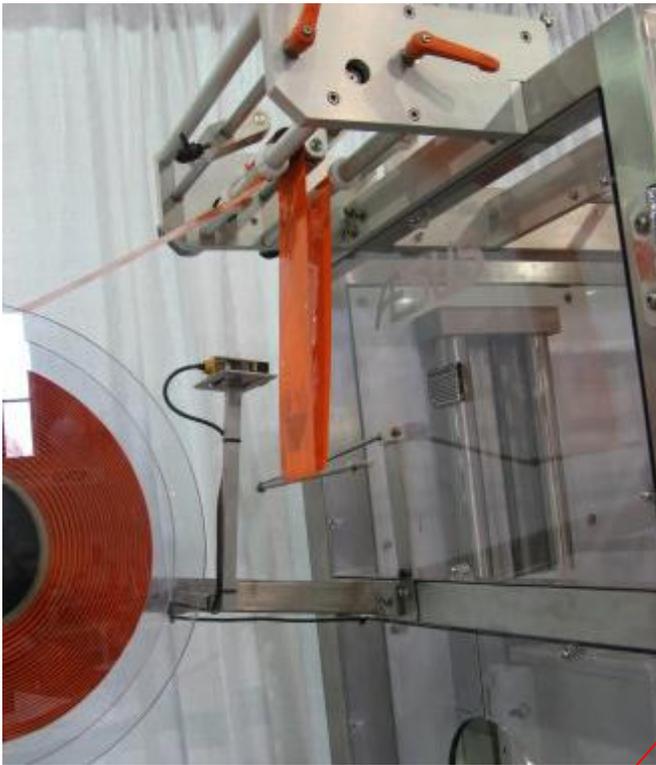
Thread the Film between the outer guide roller and up over the perforation roller if fitted.
